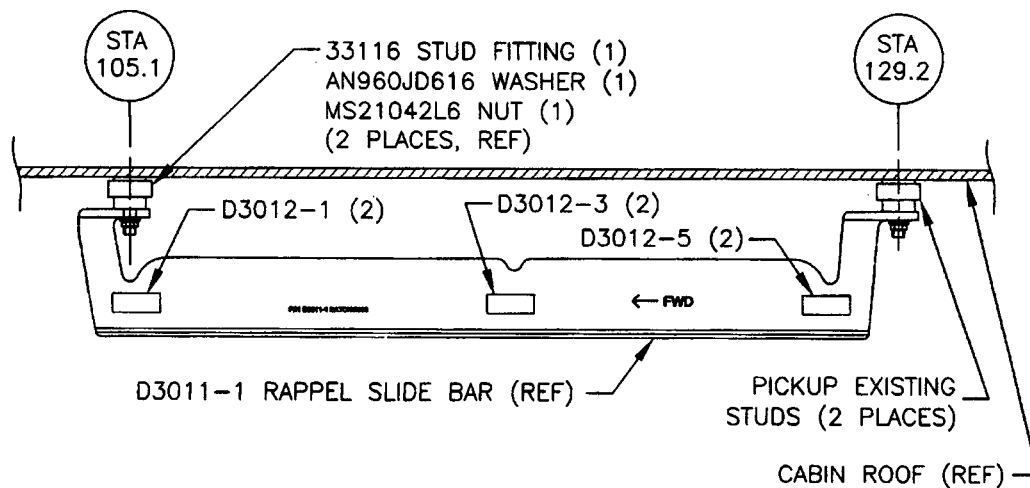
Installation of D205-523-043 Slide Bar Assembly
